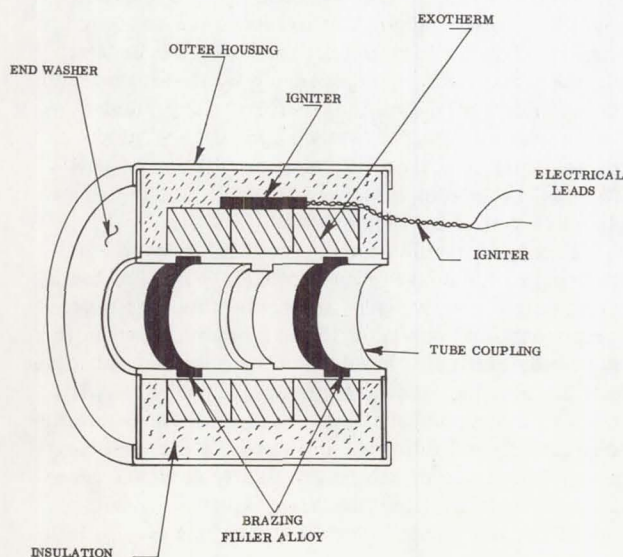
Cutaway view of pyrobrazing tube coupling unit
